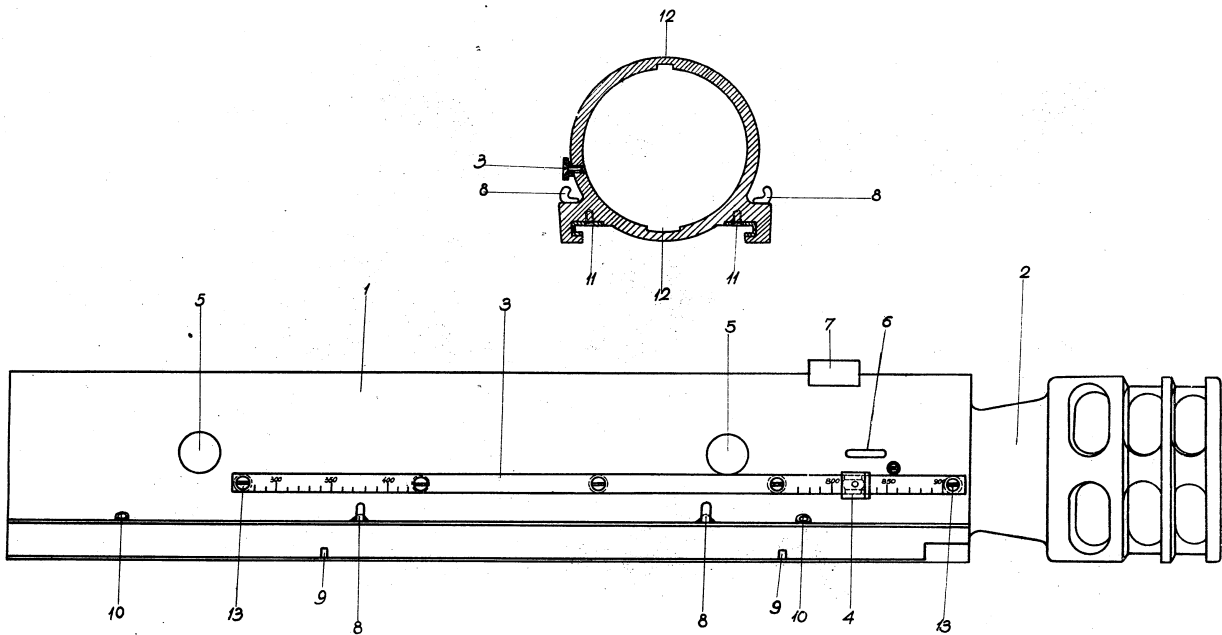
MANTLE WITH THE MUZZLE BRAKE — ASSEMBLY
